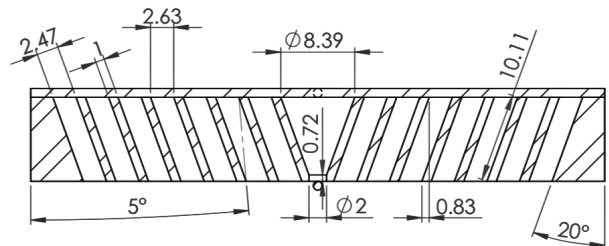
Vertical cross-section of the middle plate inside SPID, its dimensions given in millimeters.
